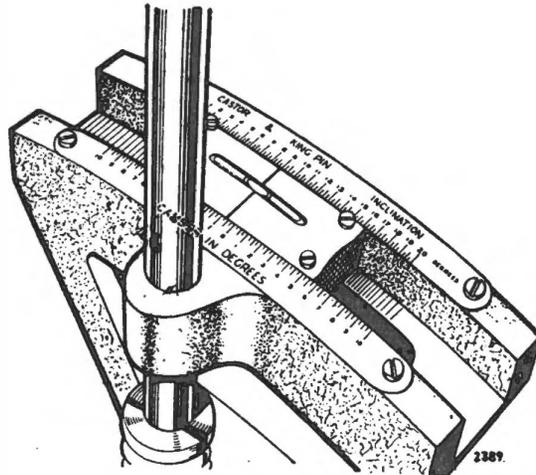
Churchill camber checking gauge No. VLC.121L showing a typical reading of $\frac{3}{8}^{\circ}$ positive camber
